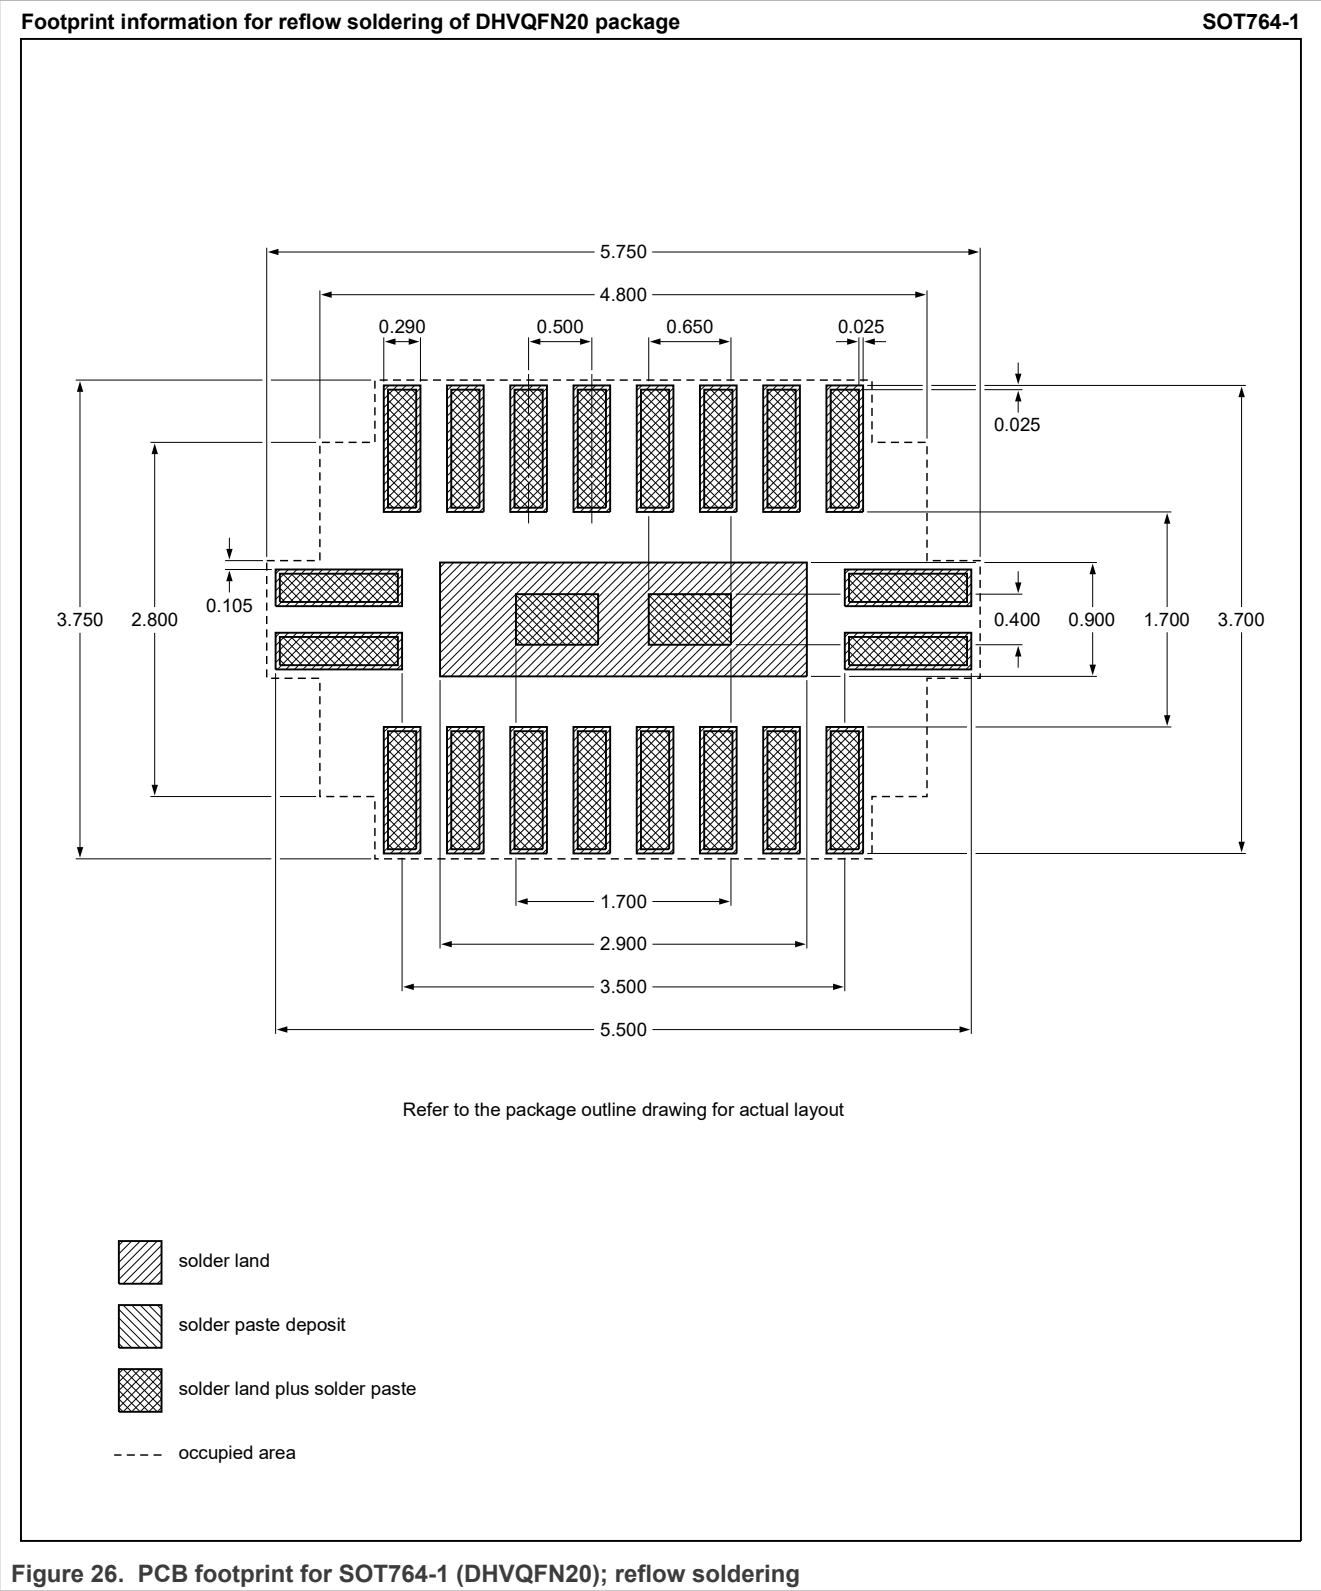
PCB footprint for SOT764-1 (DHVQFN20); reflow soldering
